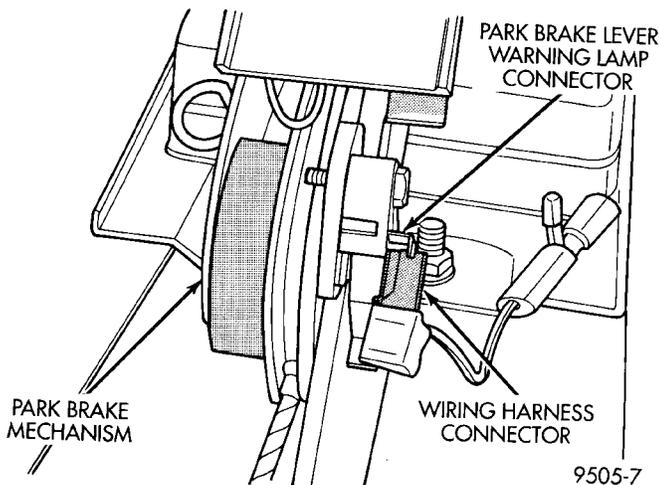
Brake Warning Lamp Connection To Park Brake Lever
